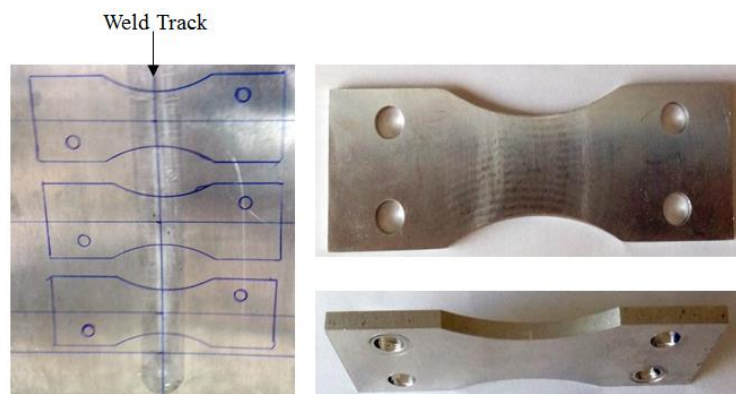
Manufacture of Bending Fatigue Friction Stir Welded Coupons
